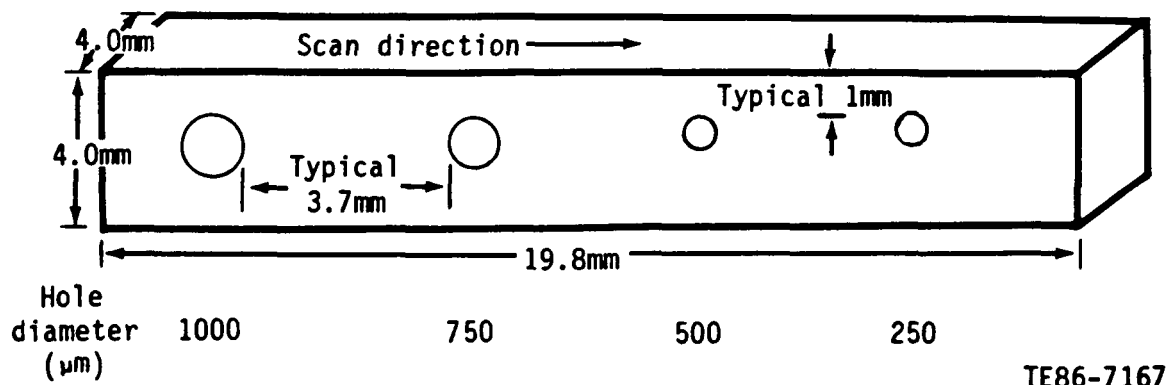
Layout of side drilled holes in as-fired sintered silicon carbide specimen.
